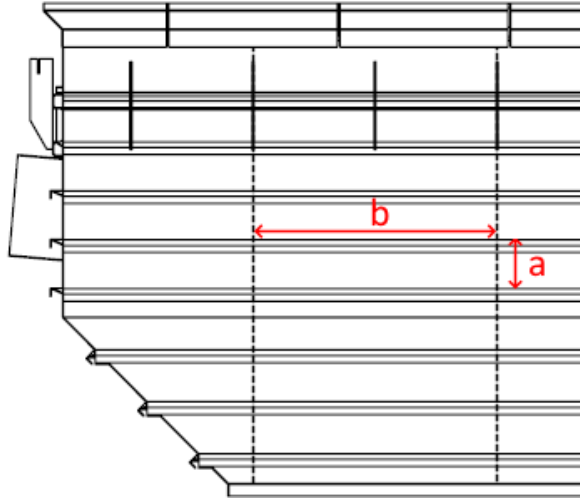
Plate segment defined by the stiffeners in a hopper wall.
